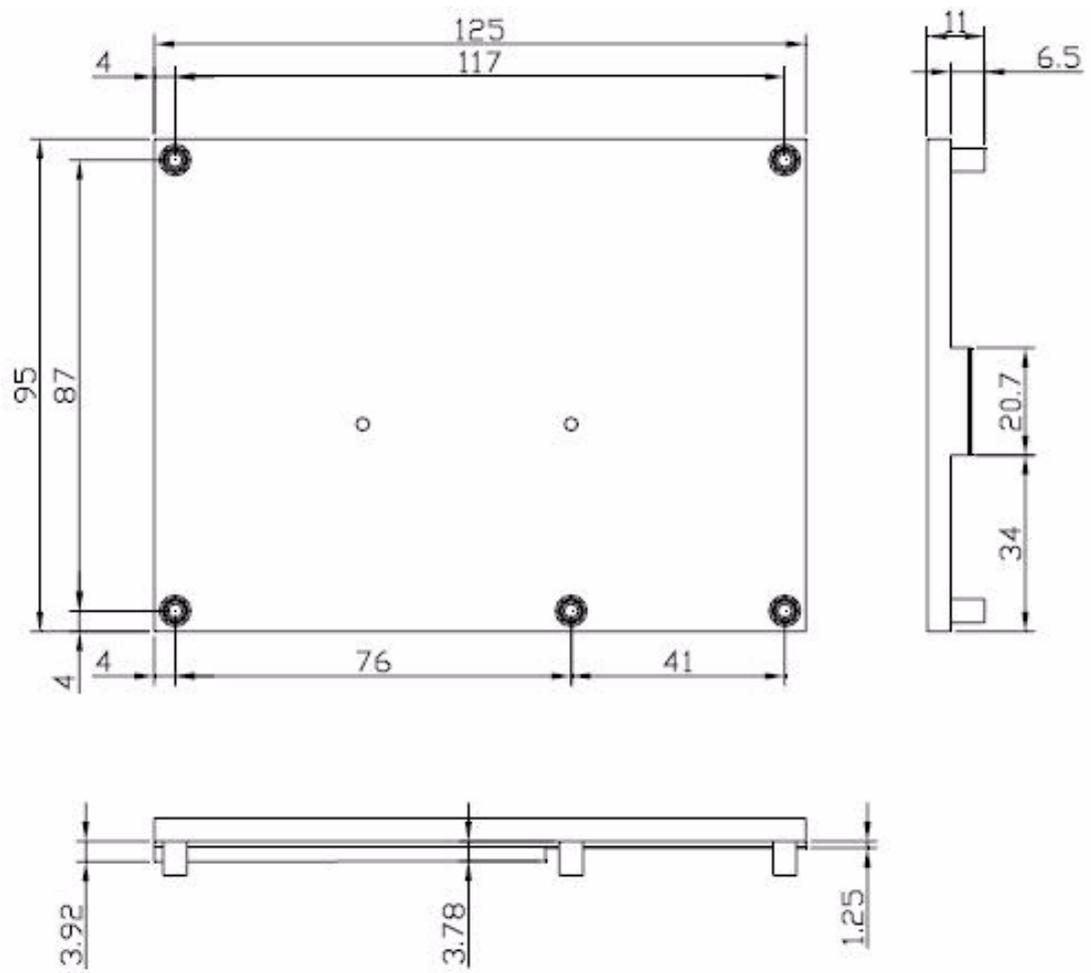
Heatspreader Drawing of Socket Type CPU
